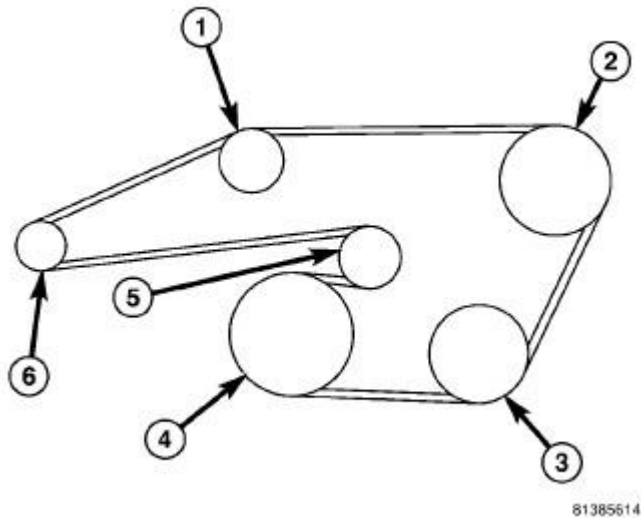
Identifying Accessory Drive Belt Routing - 3.5L
